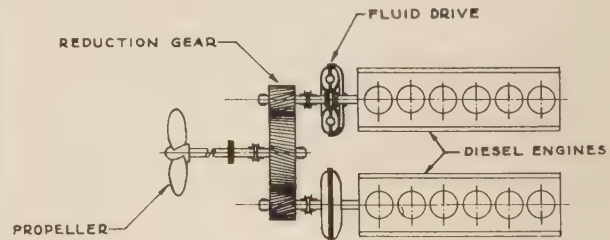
TWO MEDIUM-SPEED DIESELS CONNECTED THROUGH HYDRAULIC COUPLINGS AND HELICAL REDUCTION GEARS TO A PROPELLER SHAFT
